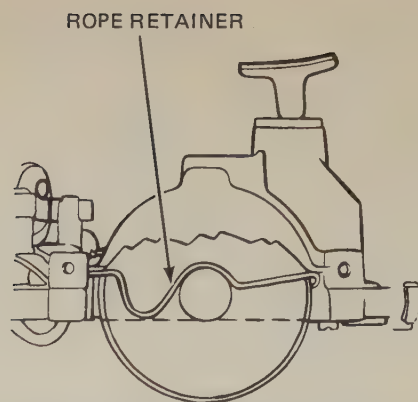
Starter-rope retainer will lock in place when the starter is properly positioned. (Evinrude Motors Division of Outboard Marine Corporation)
